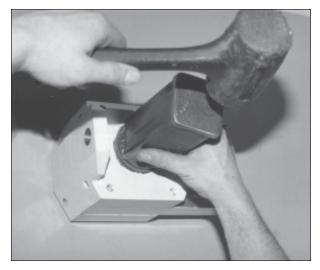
A. Seal is tapped into place using a seal installer. (Option 1)
